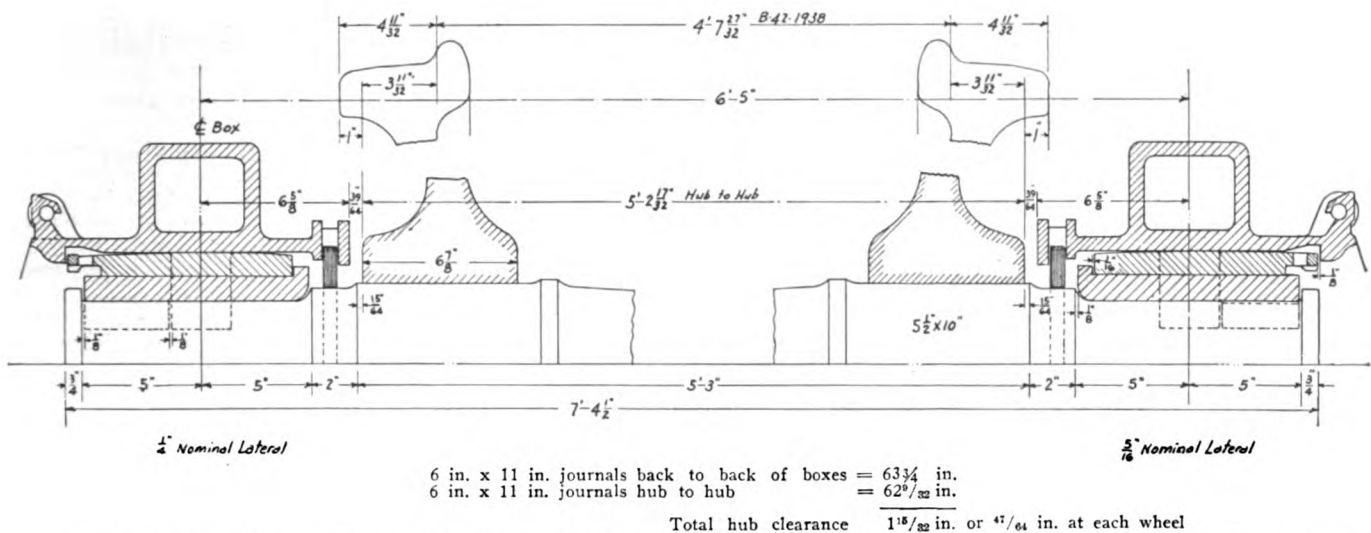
This shows the relative location of the several parts with nominal lateral. The wheels and journal boxes are centrally located
